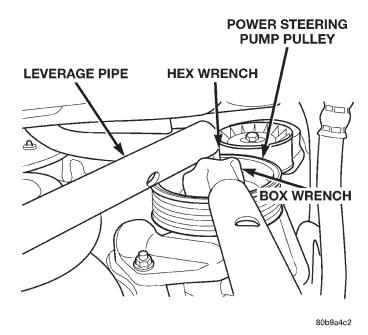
Removing the Power Steering Pump Pulley NOTE: Mark the position of the H-Block in relation to the A/C Compressor so it may be reinstalled in the same position.
